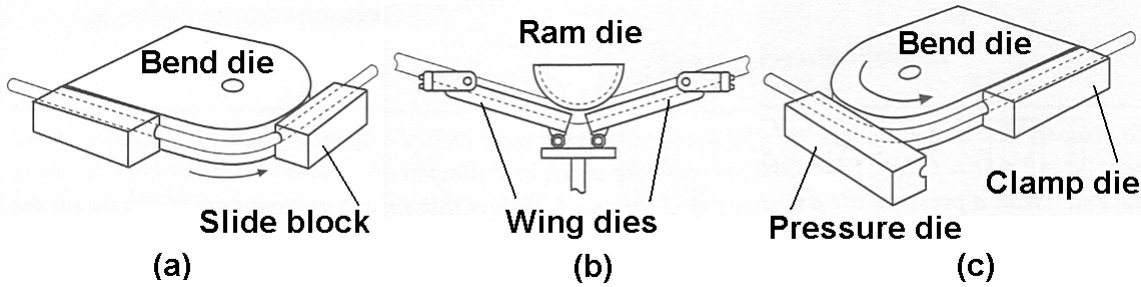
Schematics of (a) compression bending; (b) press bending; (c) rotary draw bending [46]
